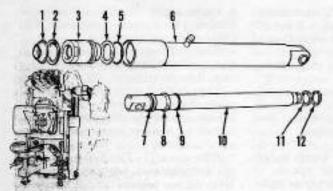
Yiew showing Model 1490 support cylinder location and exploded view of cylinder.
